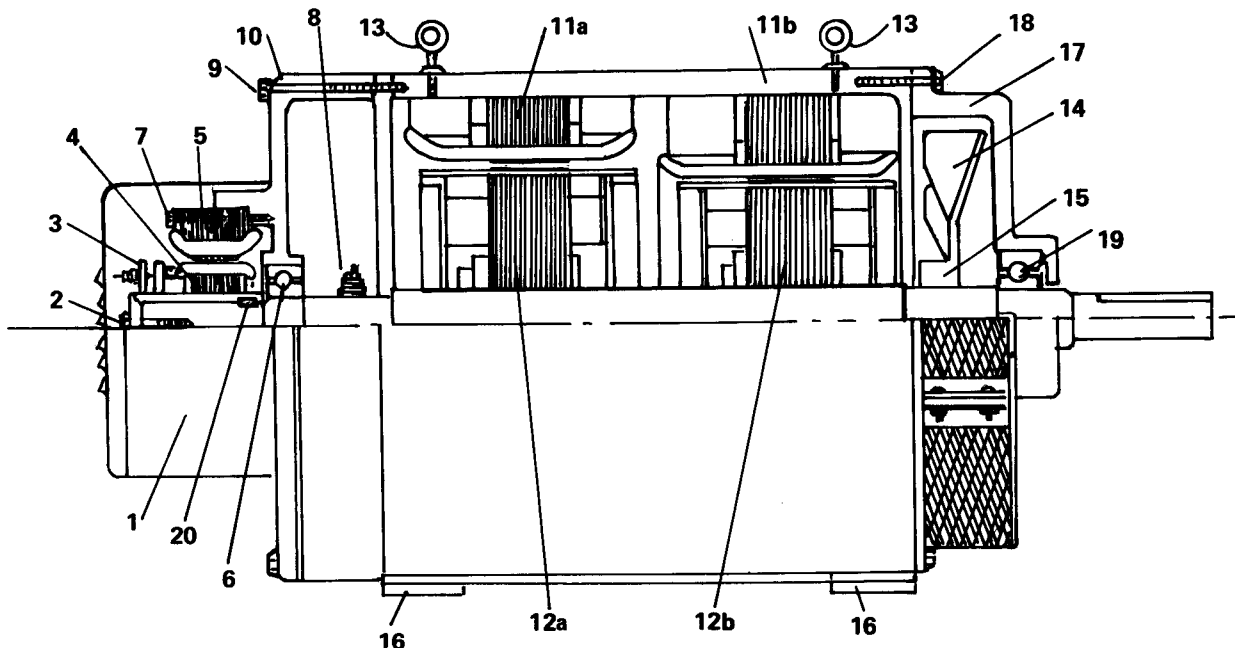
KATO Common Frame Brushless Motor-Generator Assembly consisting of a Brushless Revolving Field Generator, Brushless Exciter and Induction Motor - Cooling Fan located outboard of Motor Rotor
